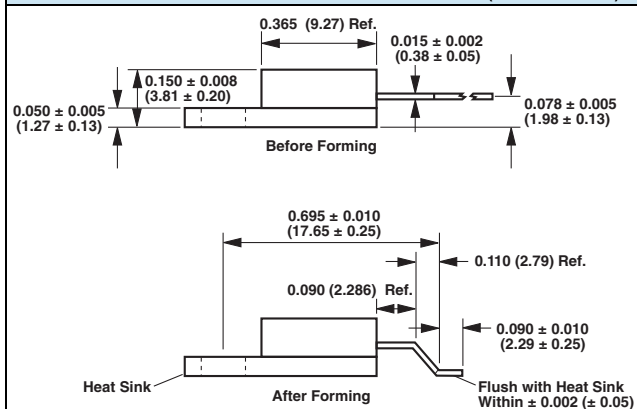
VPR221SZ DIMENSIONS in inches (millimeters)
